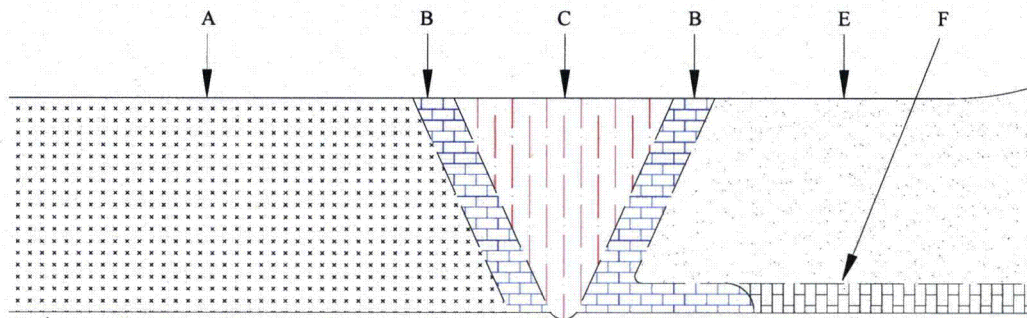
Typical BWR recirculation outlet nozzle, nozzle butter, weld and safe end.
